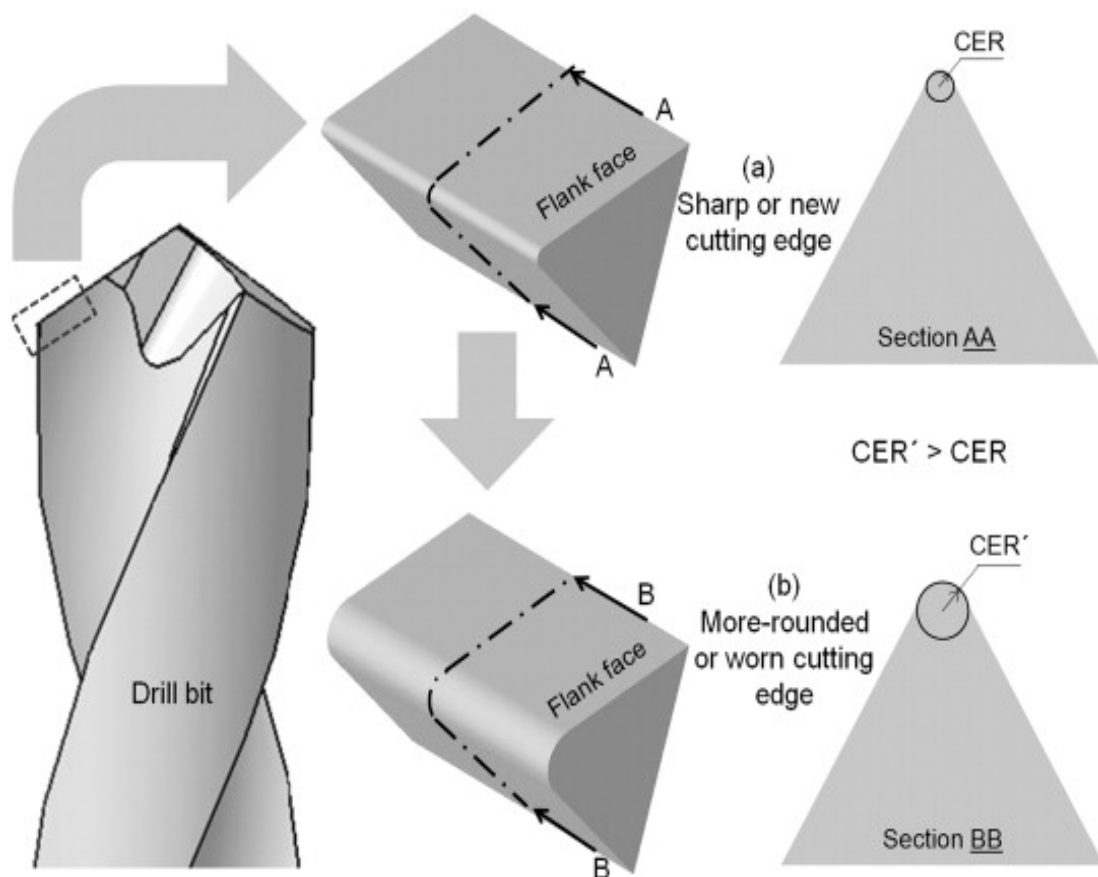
Tool wear analysis [Faraz et al.,2009]
